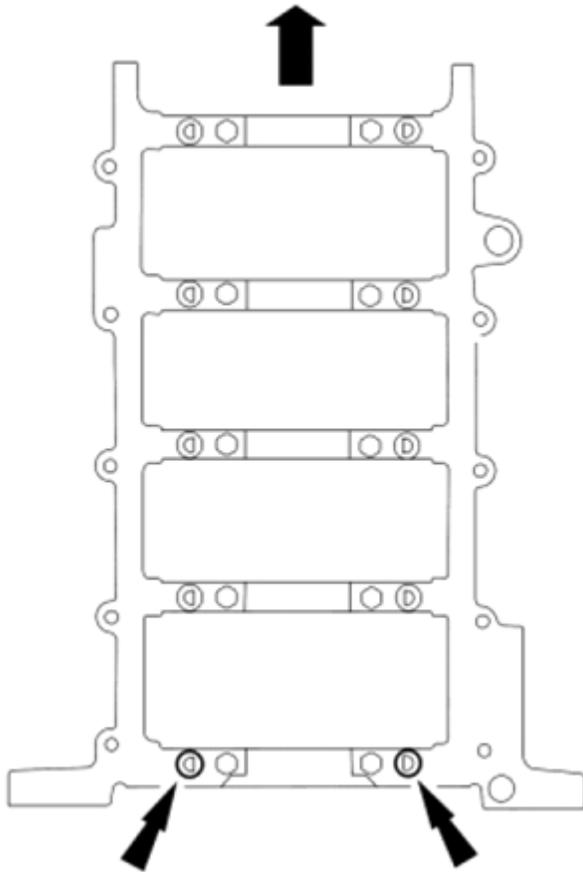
Installing Lower Crankshaft Thrust Washer To Back Side
